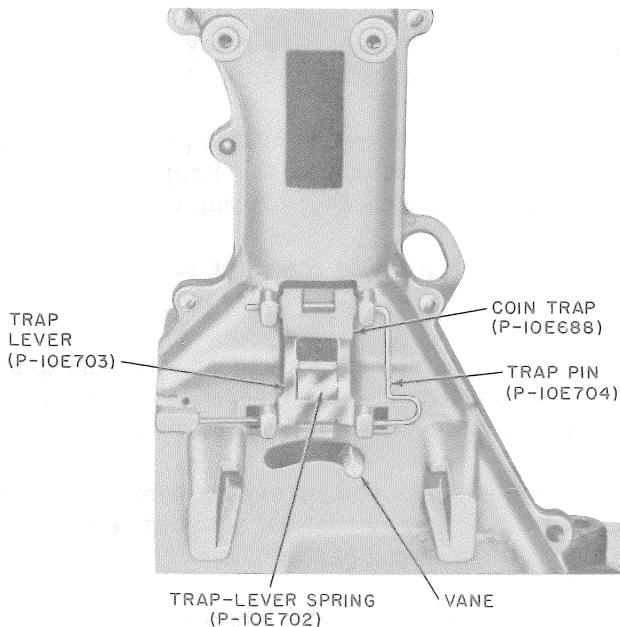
Trap-Lever Spring and Trap-Lever Assembly
